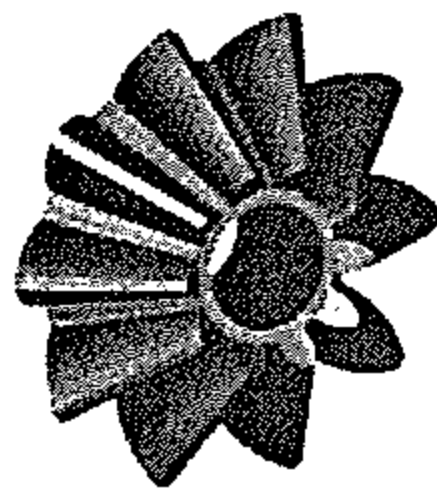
Bevel gear constructed by using surfaces to cut a solid
